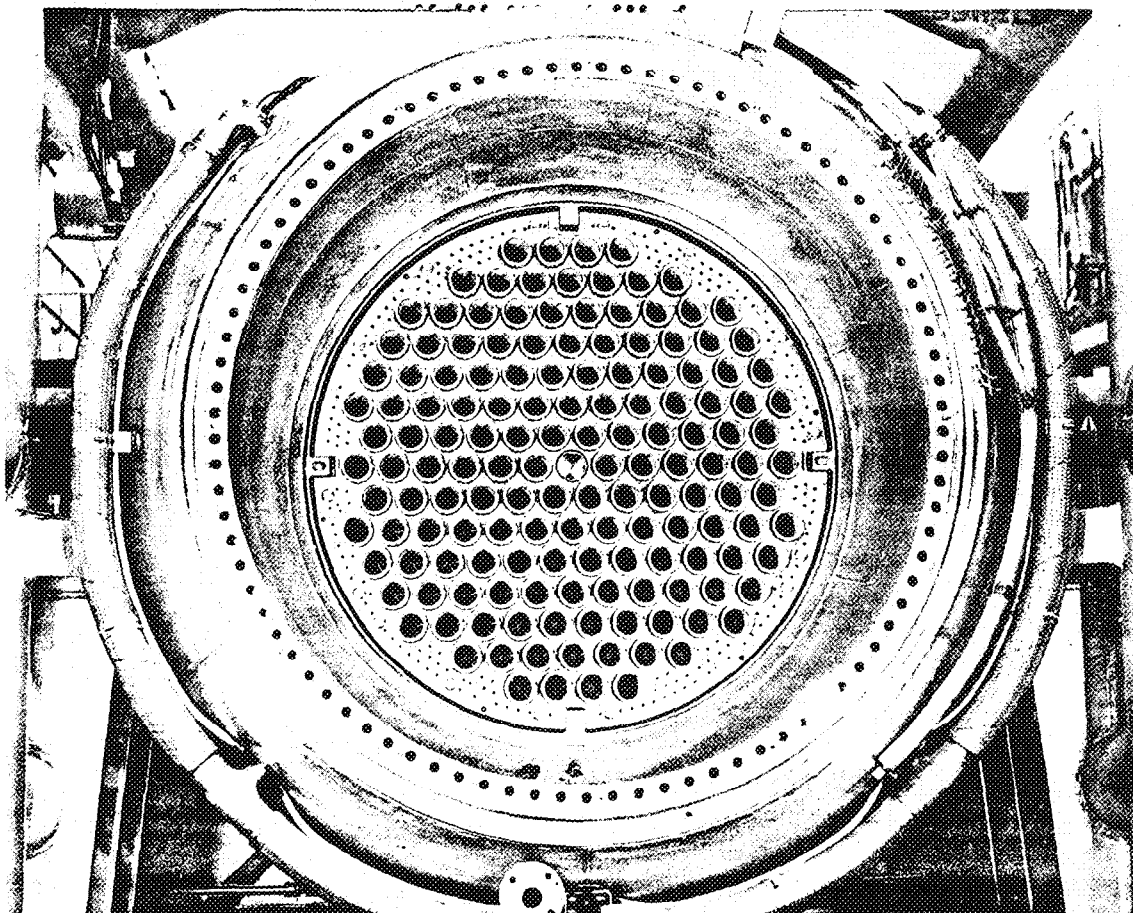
Rear tube sheet exposed after removal of cambuster and rear plug
